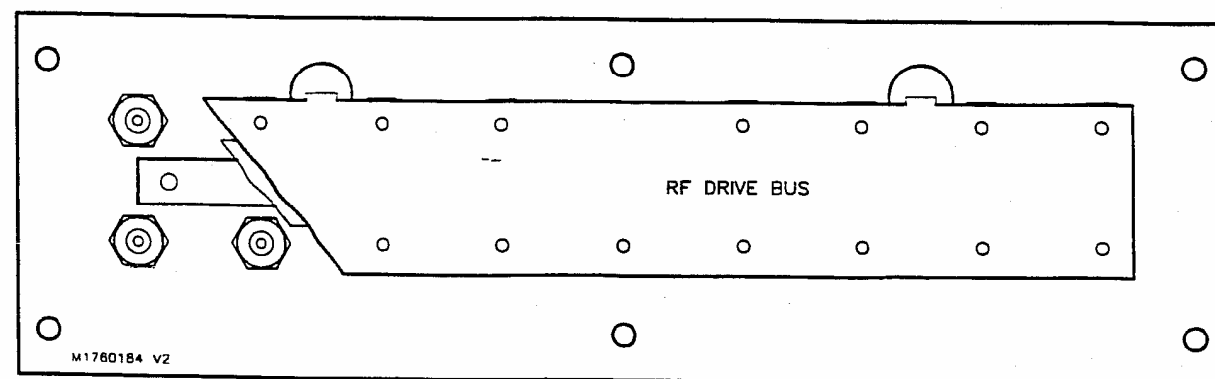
Assembly Detail - RF Drive Splitter (P/N 176-8240)
